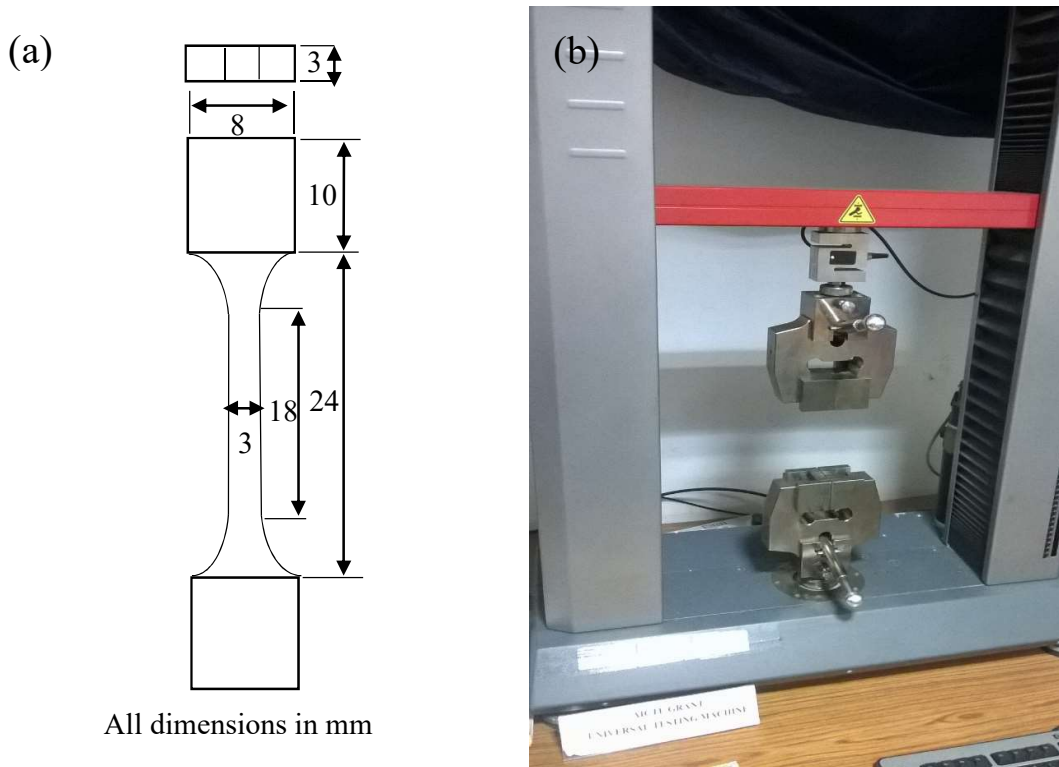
(a) Standard tensile test specimen and (b) Zwick-Roell Z010 tensile testing machine (Photo courtesy: Chemical department, TU, Patiala)
